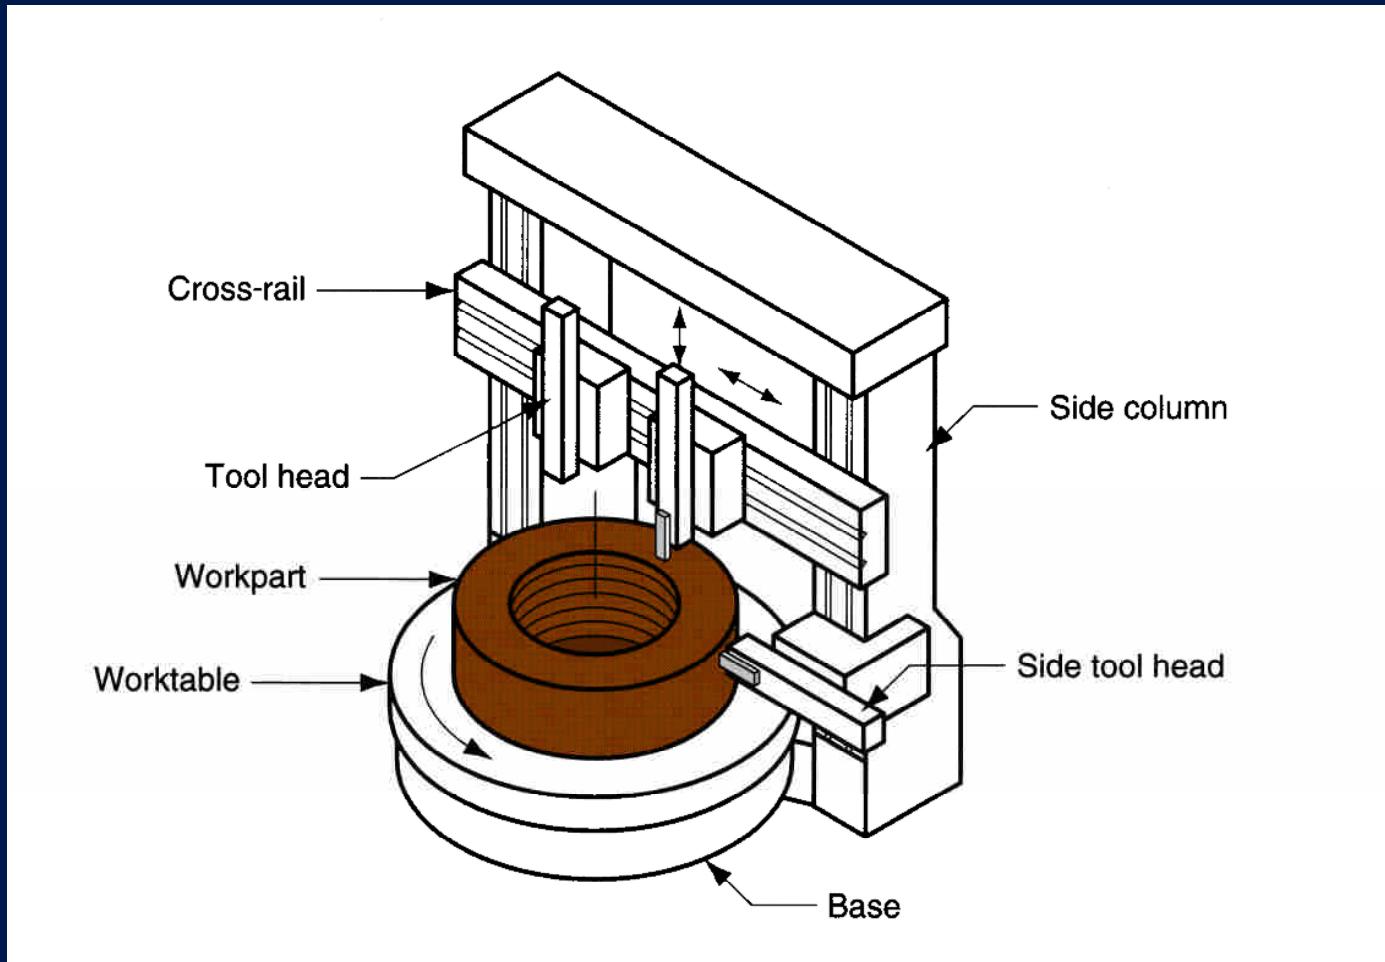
A vertical boring mill –for large, heavy workparts
